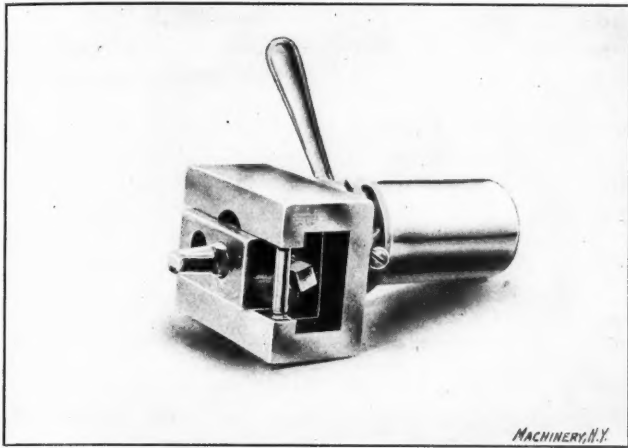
A Convenient Recessing Tool for Screw Machine Work
